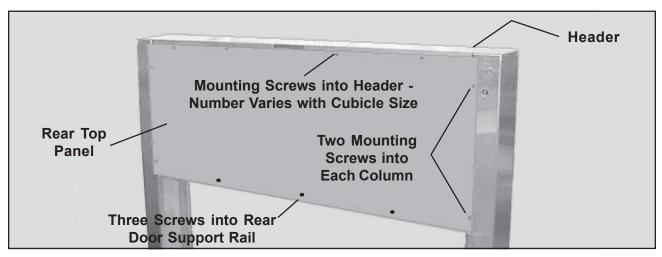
Rear View of Cubicle Showing Rear Top Panel
